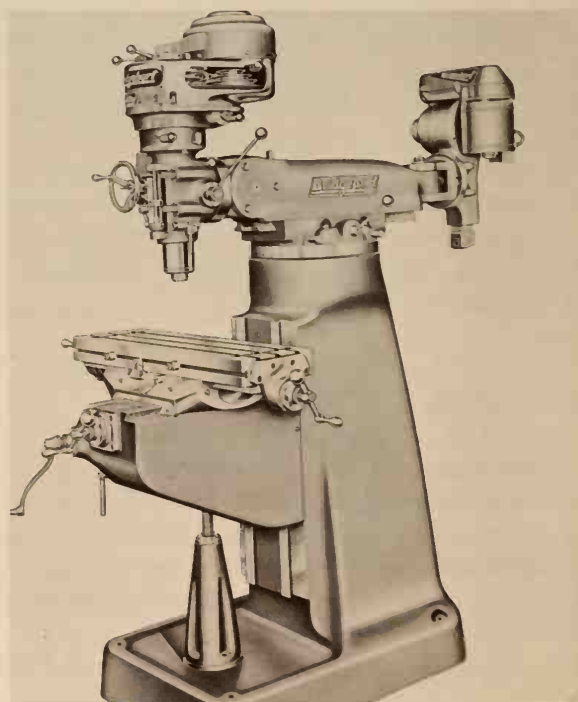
Vertical milling machine. (Bridgeport Machines, Inc.)
